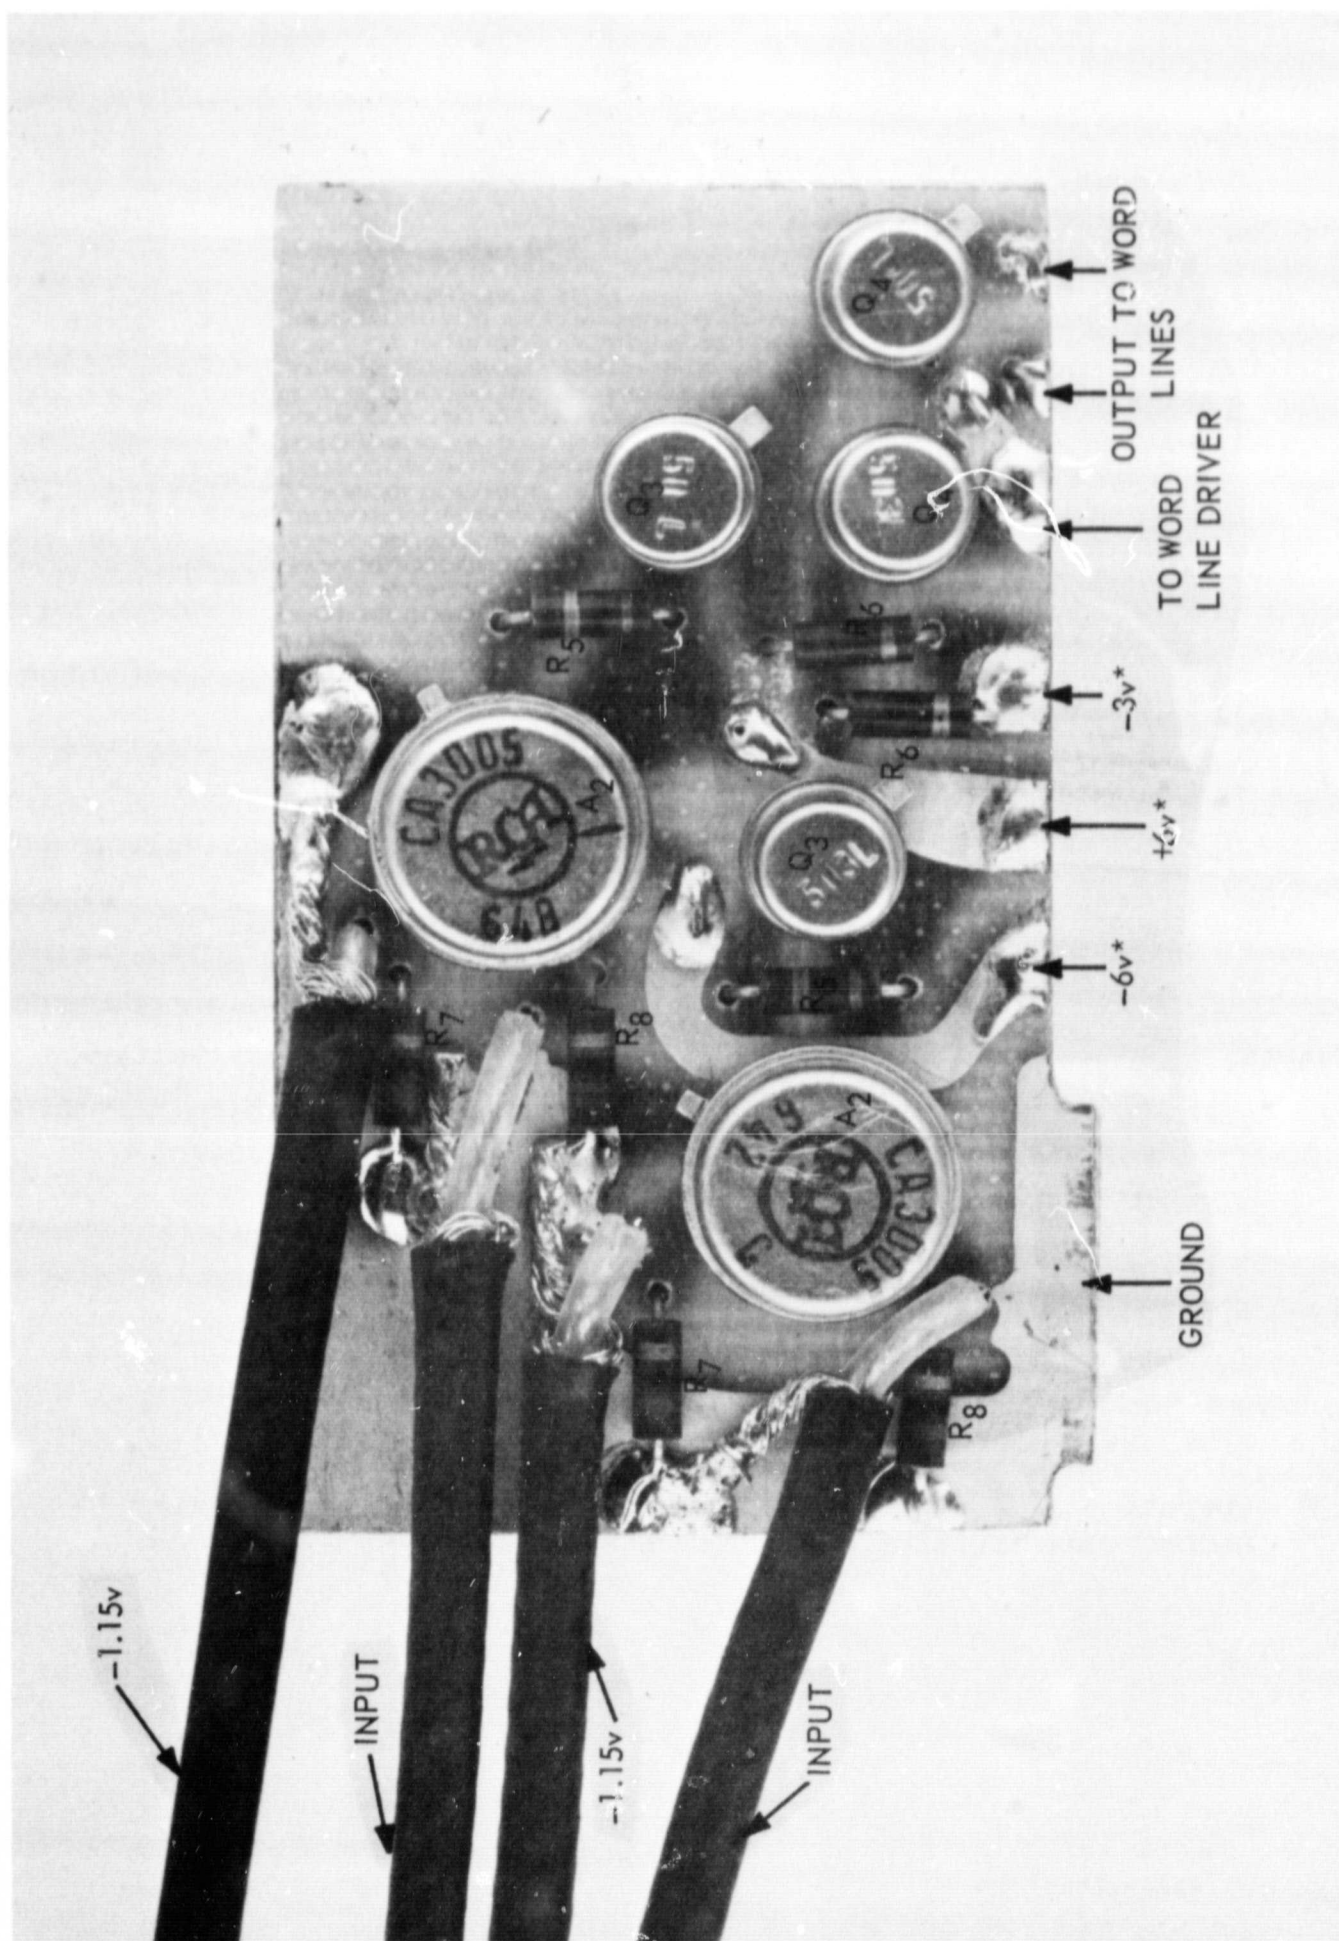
Parts identification for HIGH gates board. There are two gates per board
